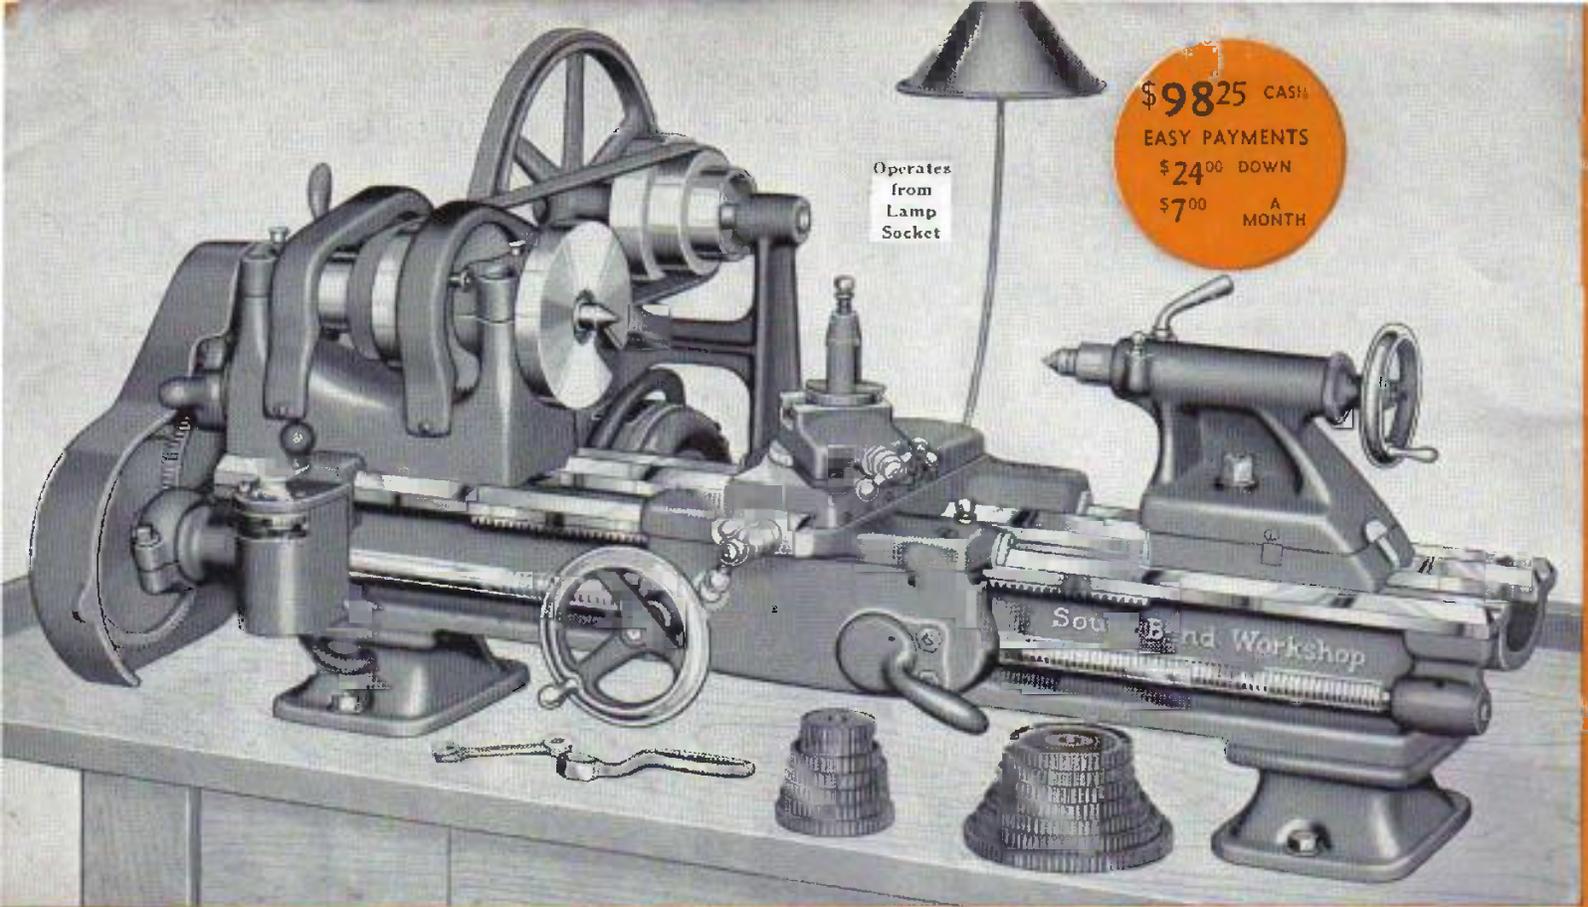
9"x3" "Workshop" Bench Lathe with Horizontal Motor Drive, motor, switch and lathe equipment, less bench (Ship. Wt. Crated 310 lbs.) \$98.25
